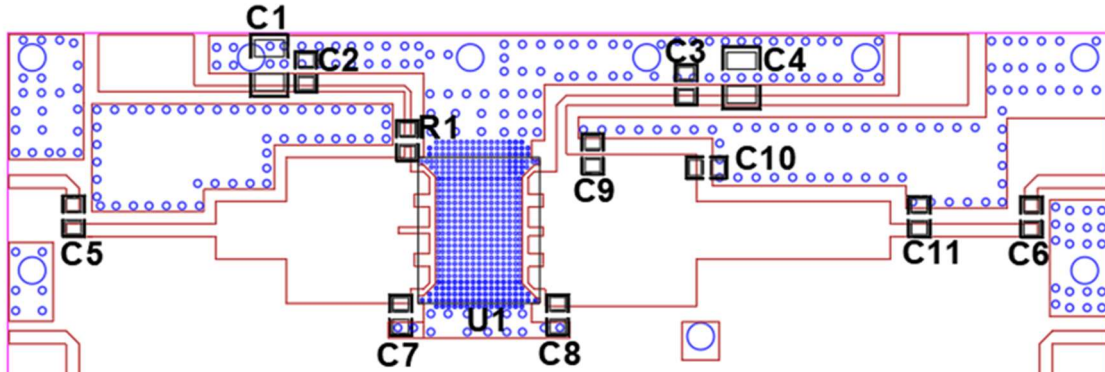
Test Circuit Component Layout, 20mils RO4350B
